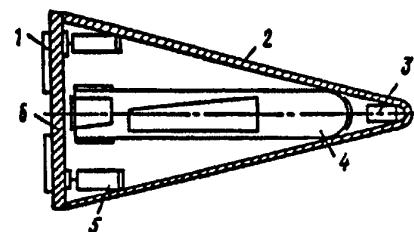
The scheme of layout of a nose cone: 1 – bank control, 2 – heat-shielding body, 3 – explosive pusher for RA injection, 4 – RA with folded wings and control surfaces, 5 – explosive pushers for bottom separation, 6 – bottom.
